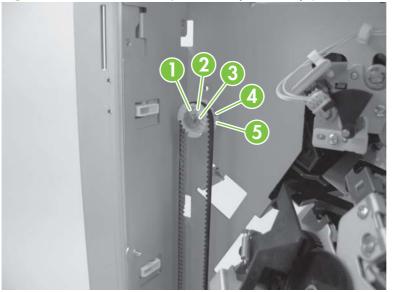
Remove the operation-tray assembly (3 of 6)
